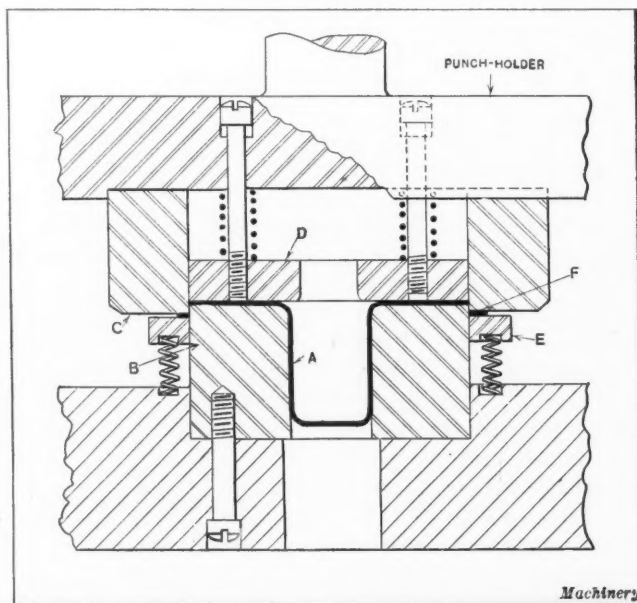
Die for trimming Flange of Deep-drawn Shell
